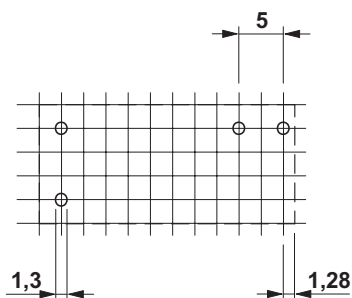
Perforations for assembly: View of the connections (2.5 mm basic grid dimension)
